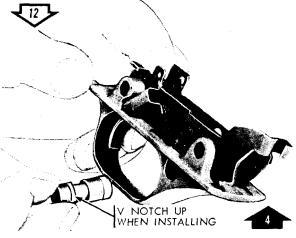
Disassembly/assembly of trigger guard group (2 of 3).
